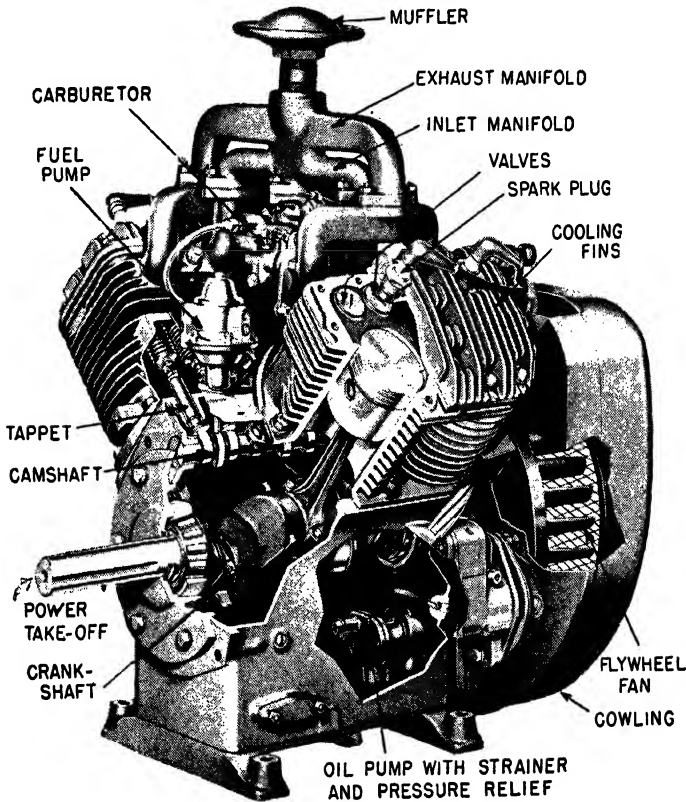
Cutaway view—spark ignition engine. Four cylinder vee type, four-cycle, air-cooled. (Courtesy Wisconsin Motor Corp.)
